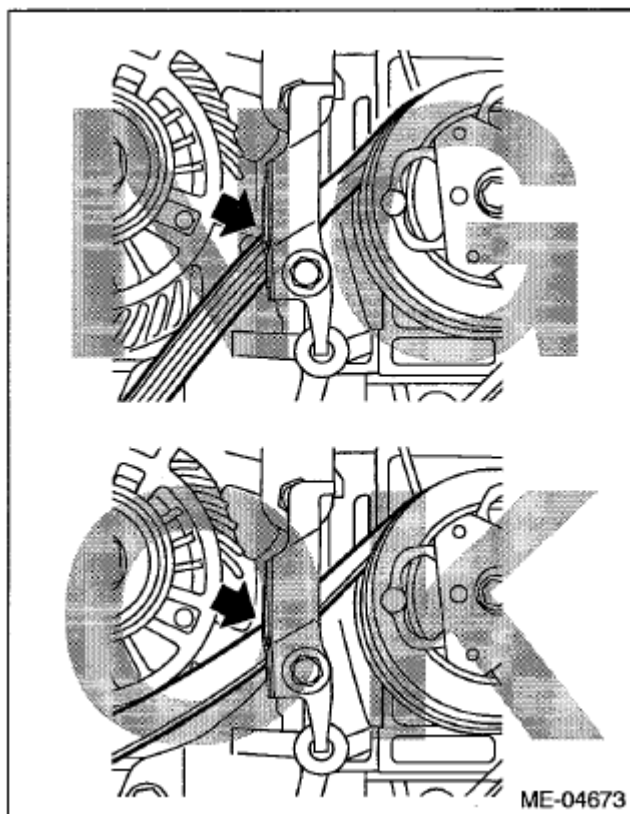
Identifying Correct And Incorrect Rear Side Belt Position
